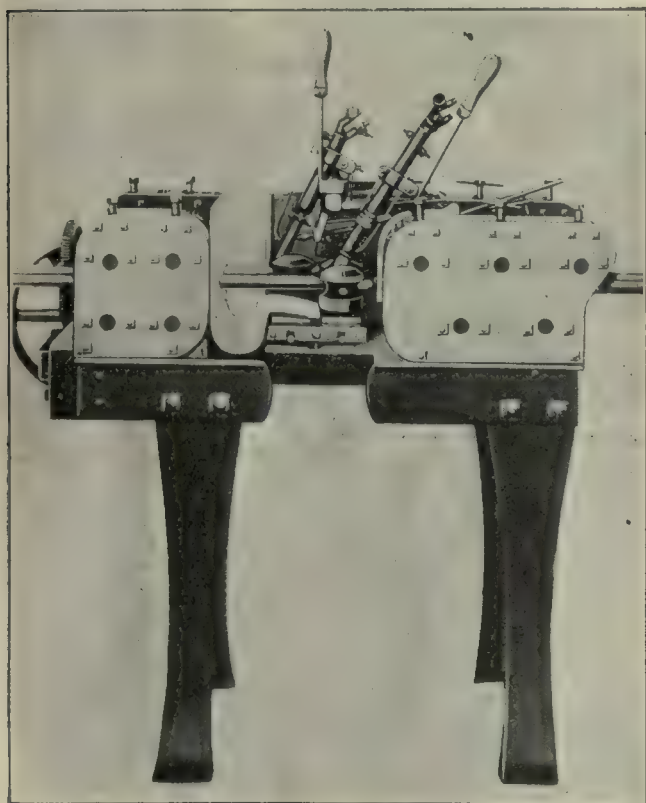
ANOTHER VIEW OF DUPLEX MACHINE
